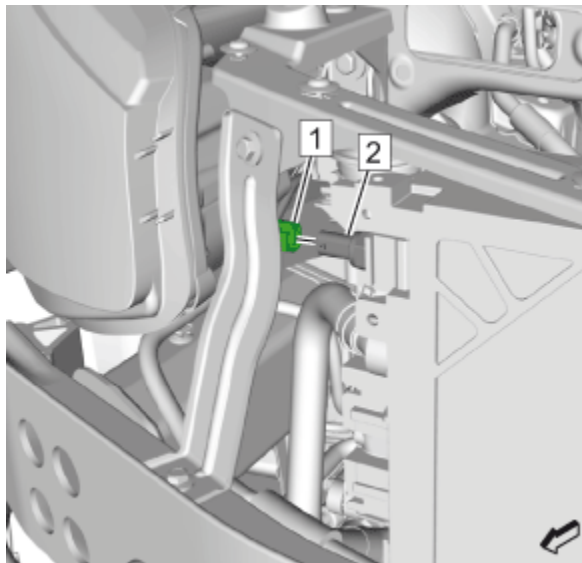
Electrical Connector And Coolant Temperature Sensor
